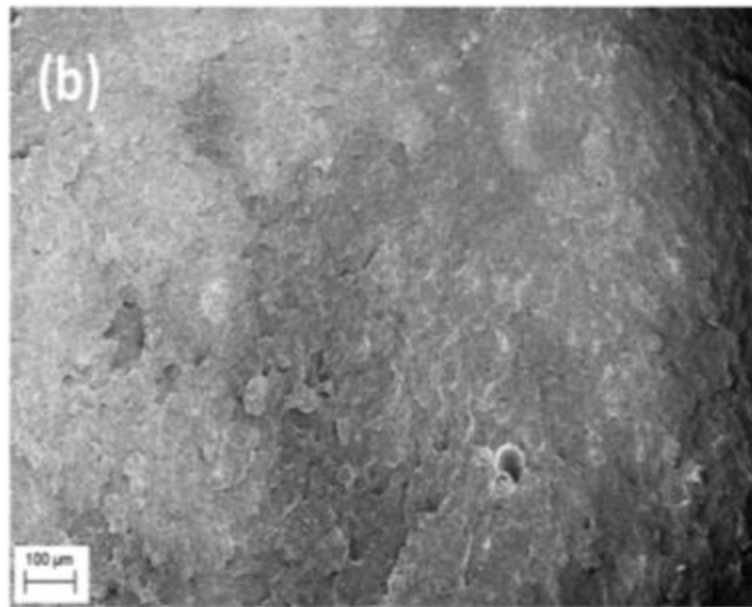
Fracture surface of (b) PA12-CNT laser sintered part
